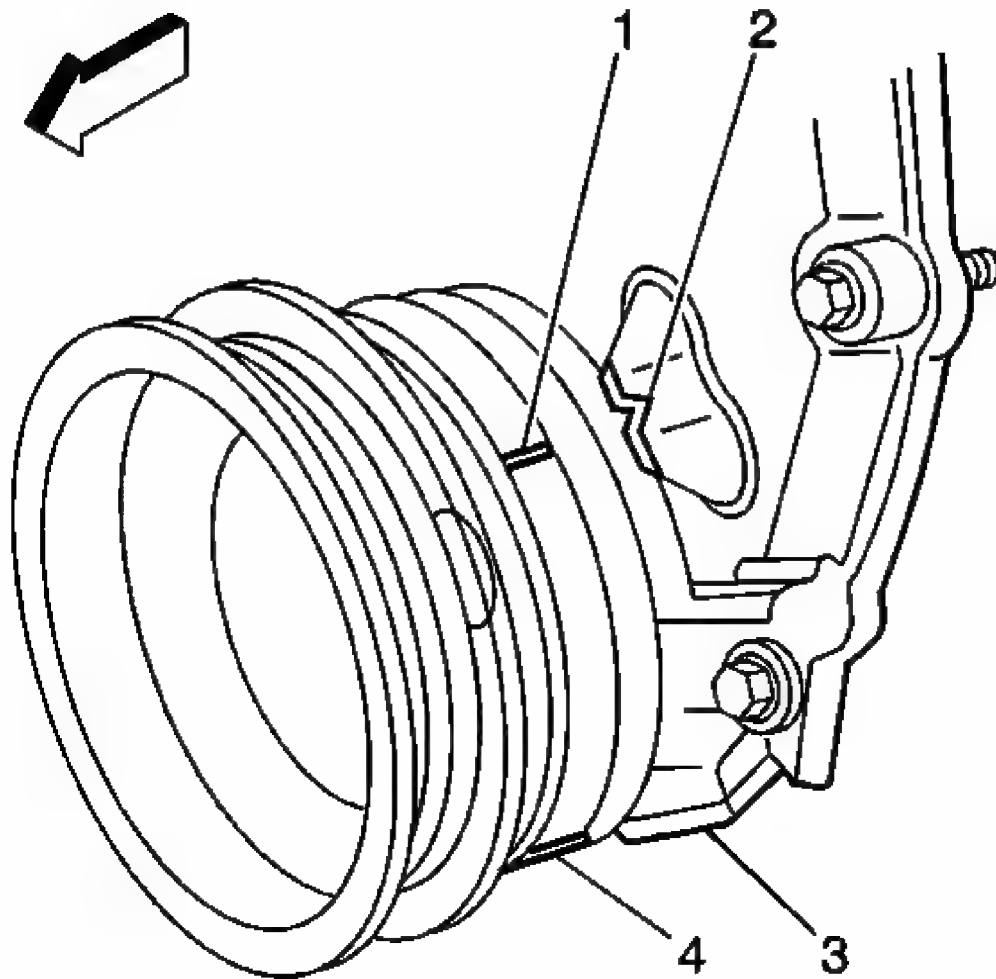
View Of Crankshaft Balancer Alignment Mark & Engine Front Cover Alignment Tab
